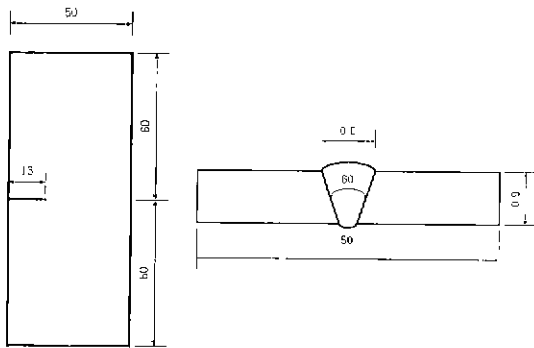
Dimension of specimen for fatigue crack propagation test
